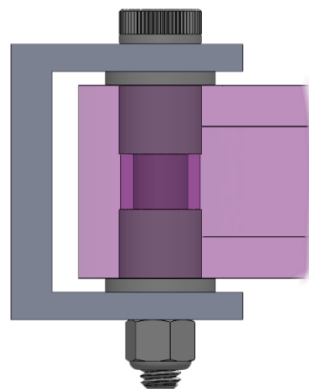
Section view of pivot, showing bracket, shoulder bolt, bushings, linkage arm (transparent)
